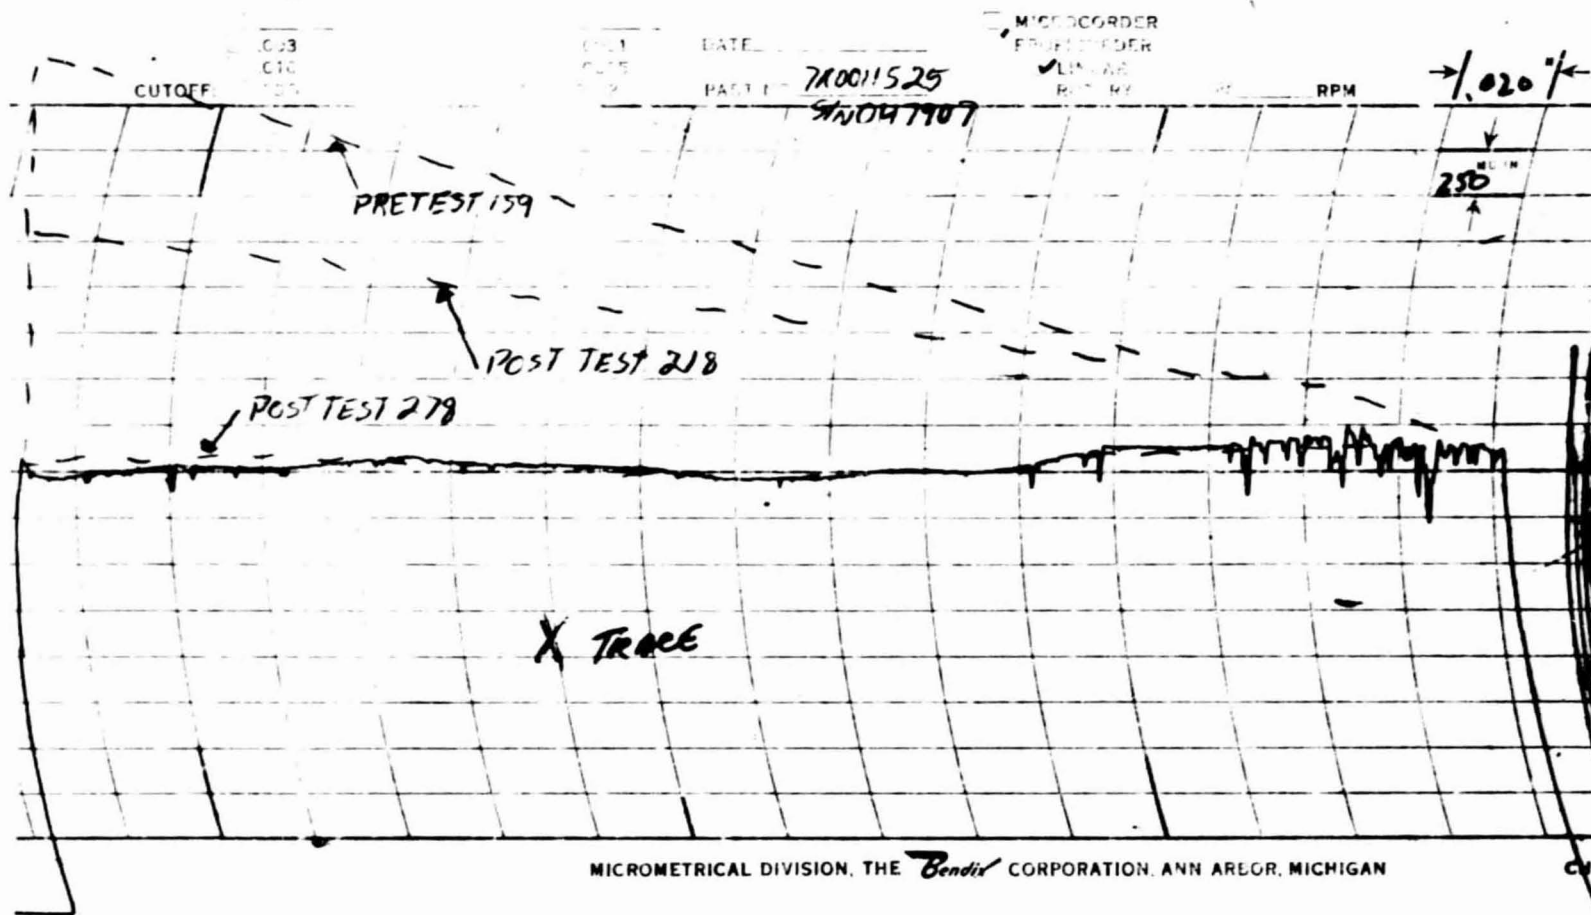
Surface Profile Trace Turbine End Primary Seal Ring, P/N 7R0011525, S/N 047907, Build 15, Posttest 297
